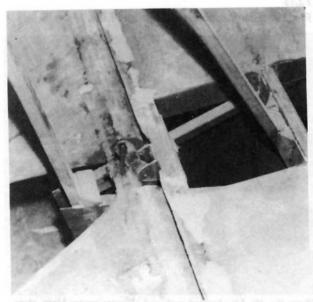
Horizontal tail group installation. Note plywood aft of vertical installation.
